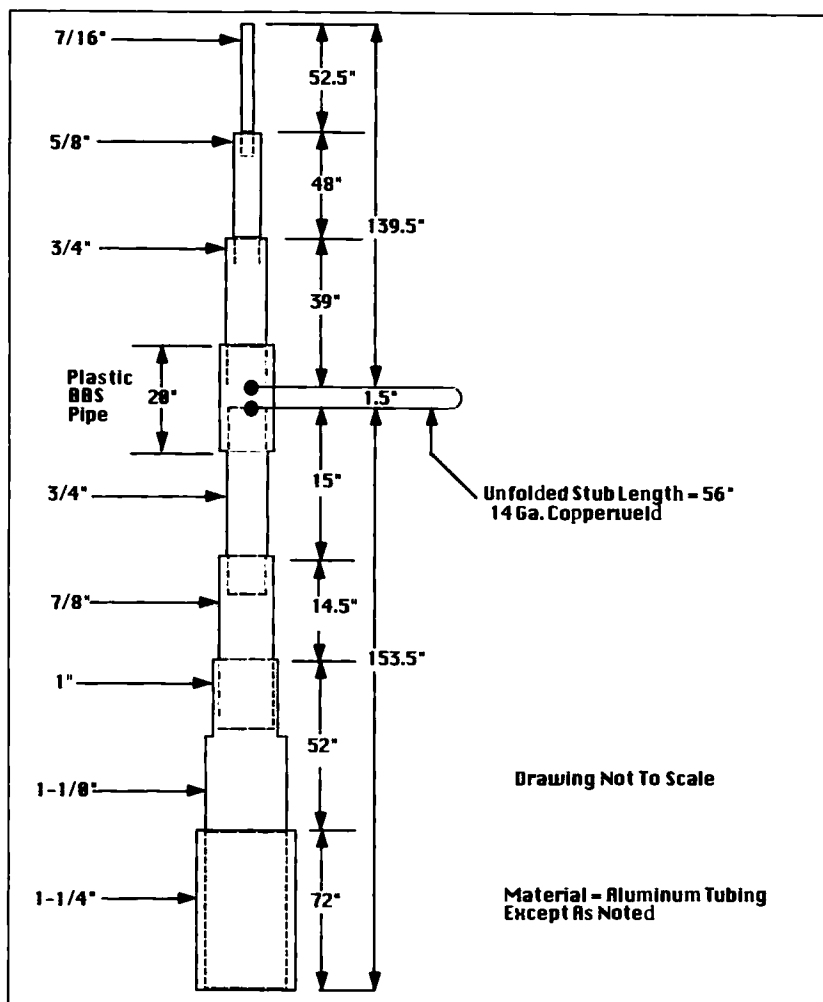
Sizes of aluminum tubing used in construction. Note that the stub connects through a section of white PVC pipe.
